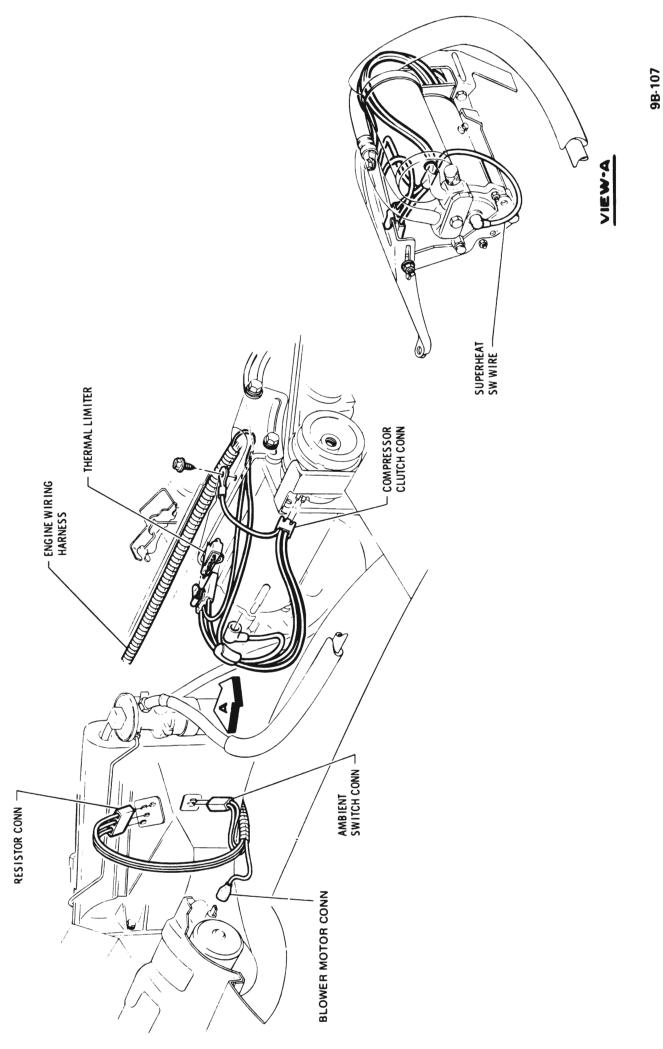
B-124 Compressor and Blower Motor Wiring - Manual A/C - B-C-E Series
